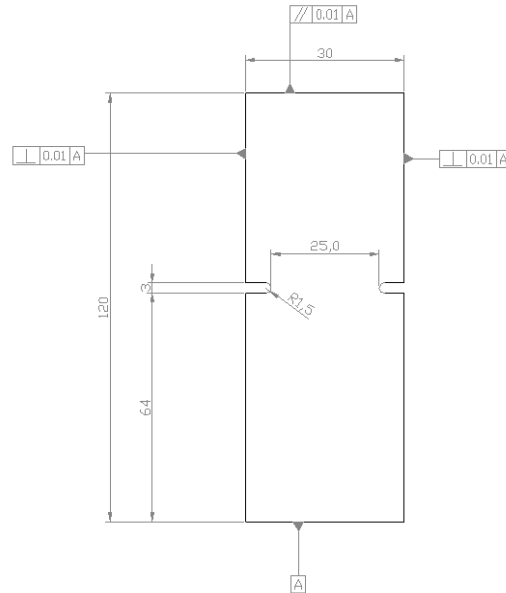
Geometry and dimensions (in mm) of the specimens used for the second plane strain tests
